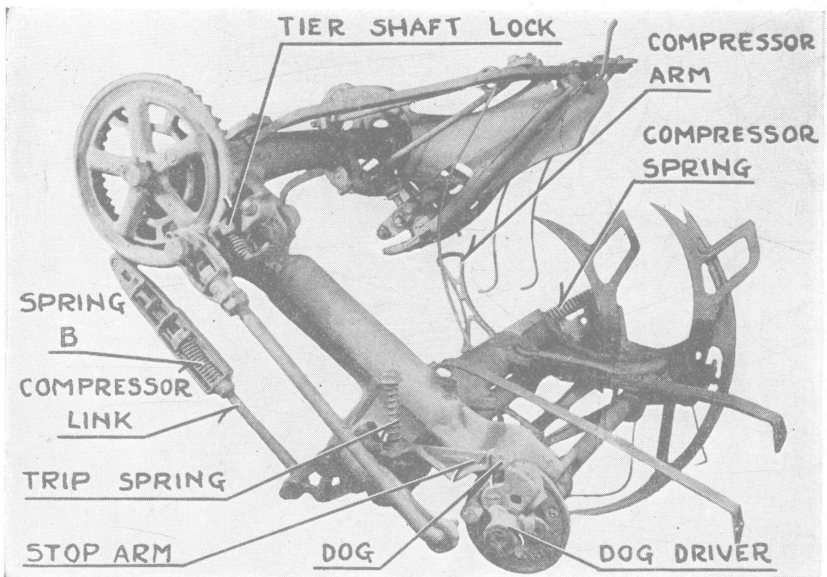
Deere Binder Head of Type With Adjustable Tier Shaft Lock.
